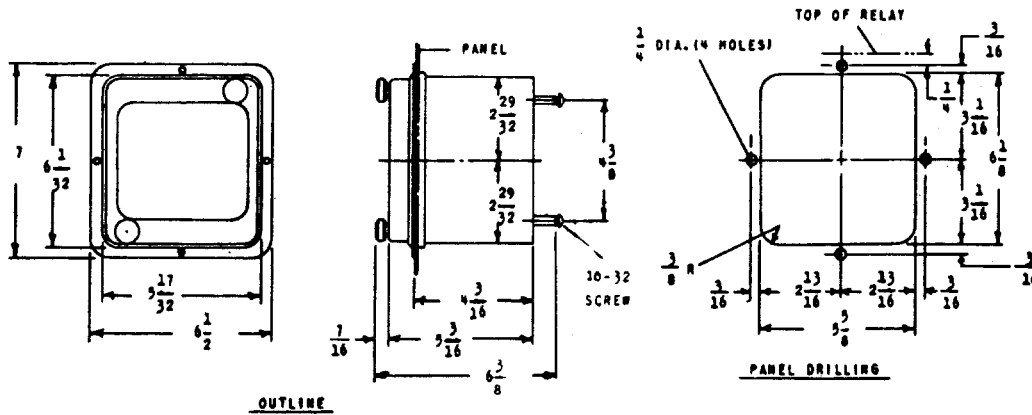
Outline and Panel Drilling Dimensions for Type HFA Relays in "F" Case
